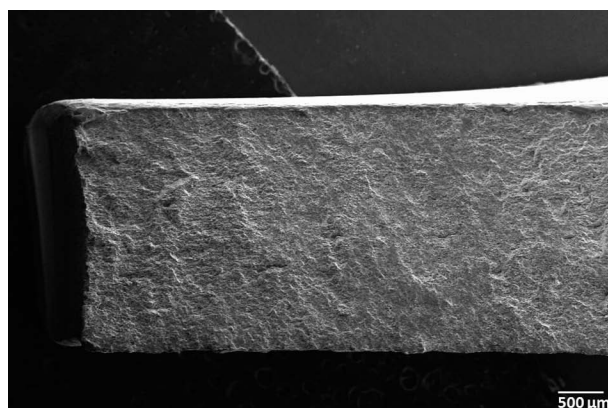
Fracture surface of a room temperature tensile-tested specimen of AA 2219-T6 sheet taken at low magnification
